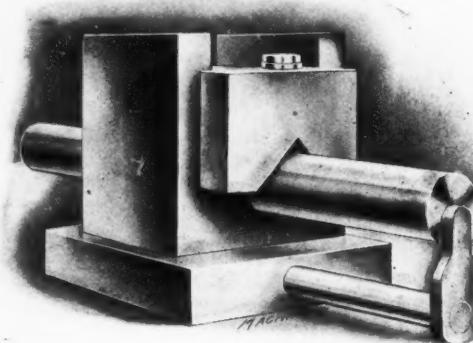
Recessed Casting for Babbitt Lined Protector, Pouring Die and Finished Protector
